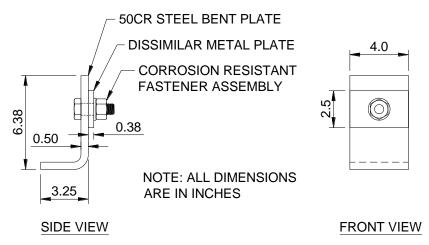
Drawing of Long-Term Corrosion Test Specimens
